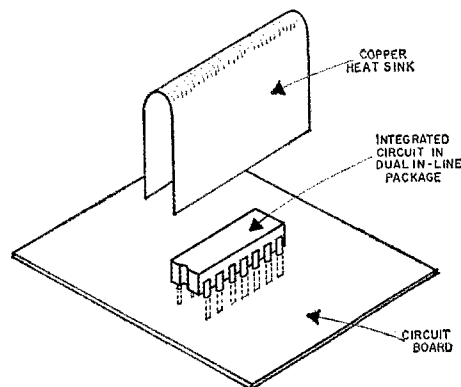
Heat sink for integrated circuits that come in dual in-line packages.
